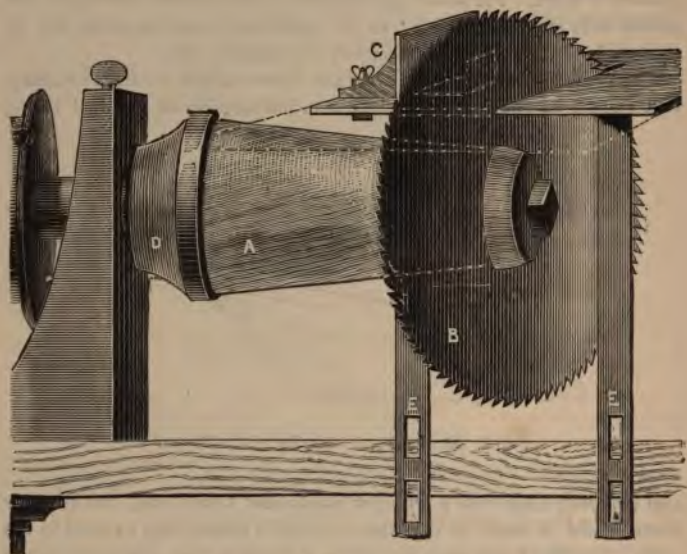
CIRCULAR SAW, MOUNTED ON WOOD CHUCK.
